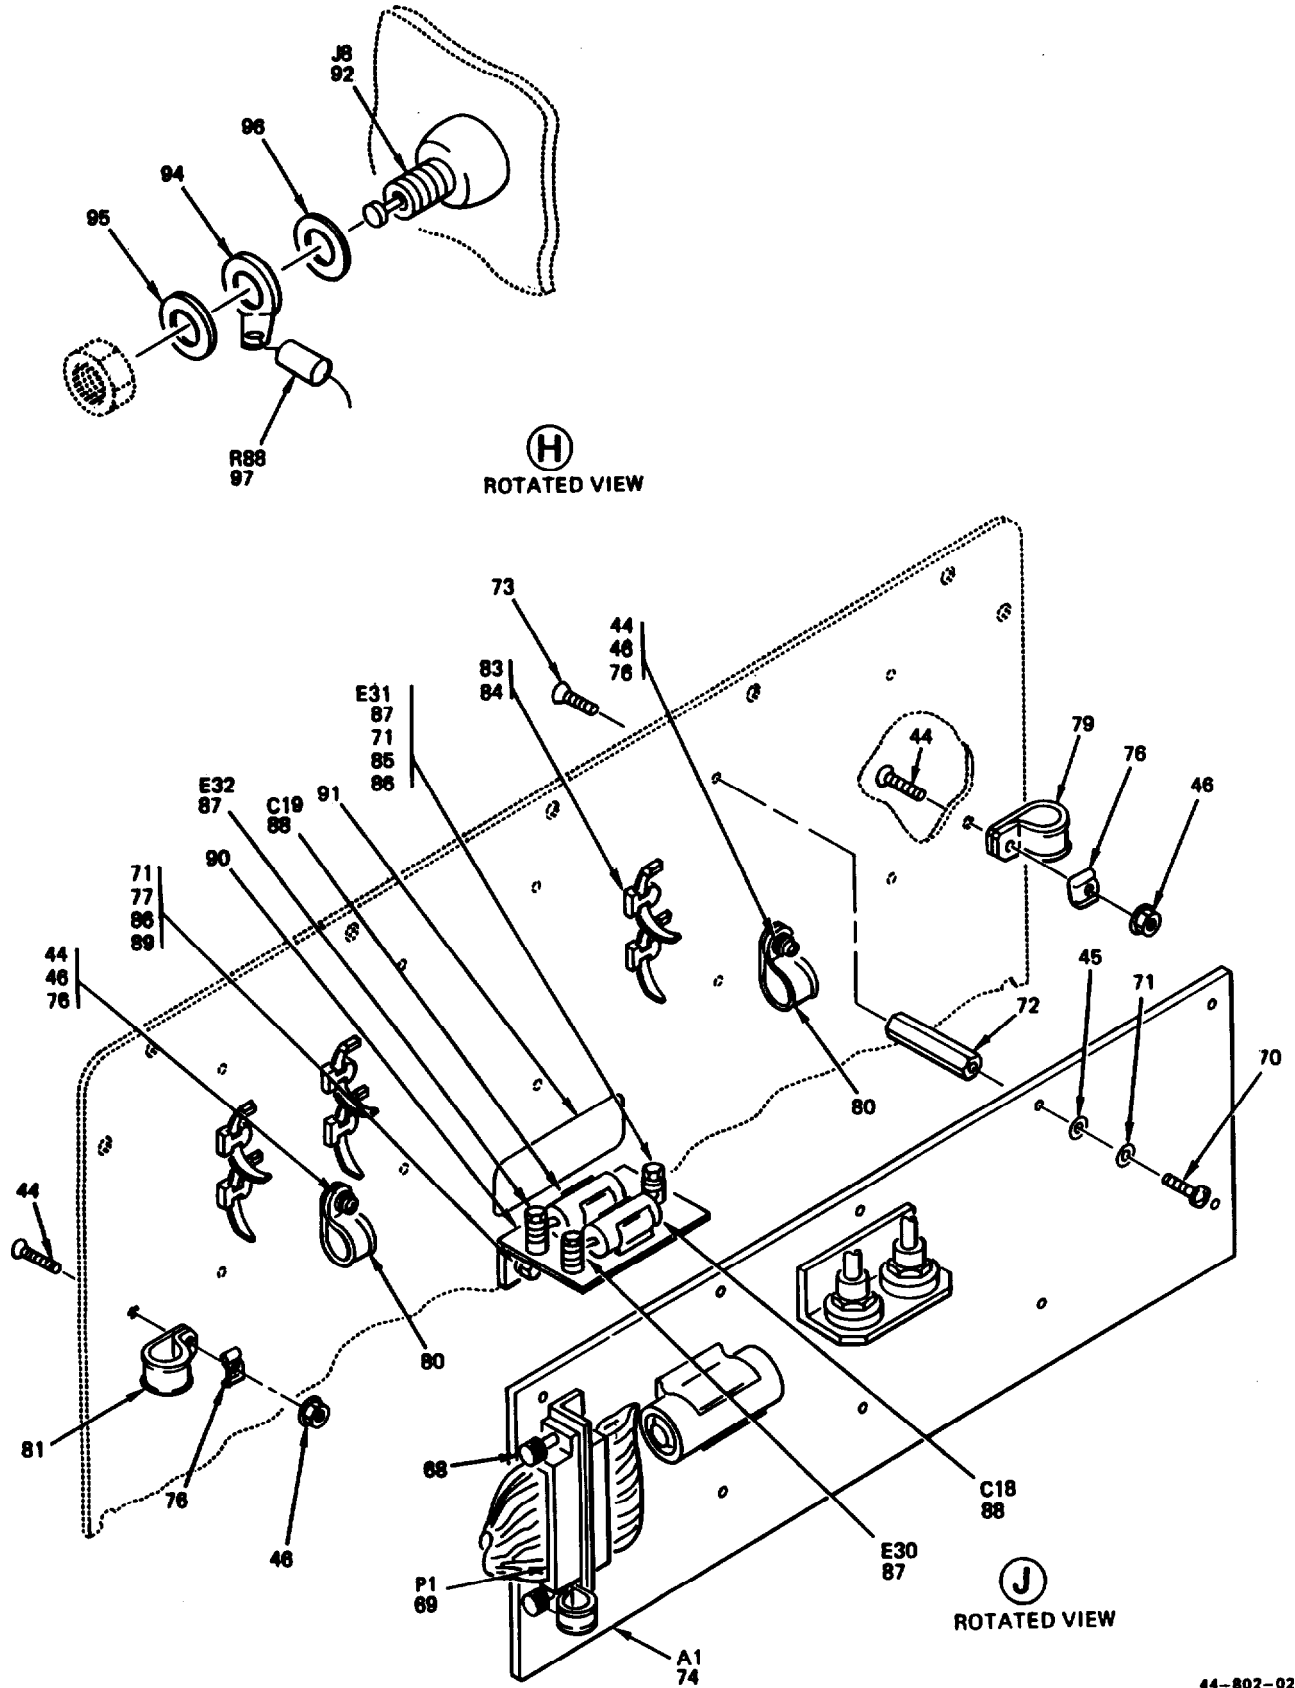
Power Supply Test Set Exploded View (Sheet 1 of 9)
